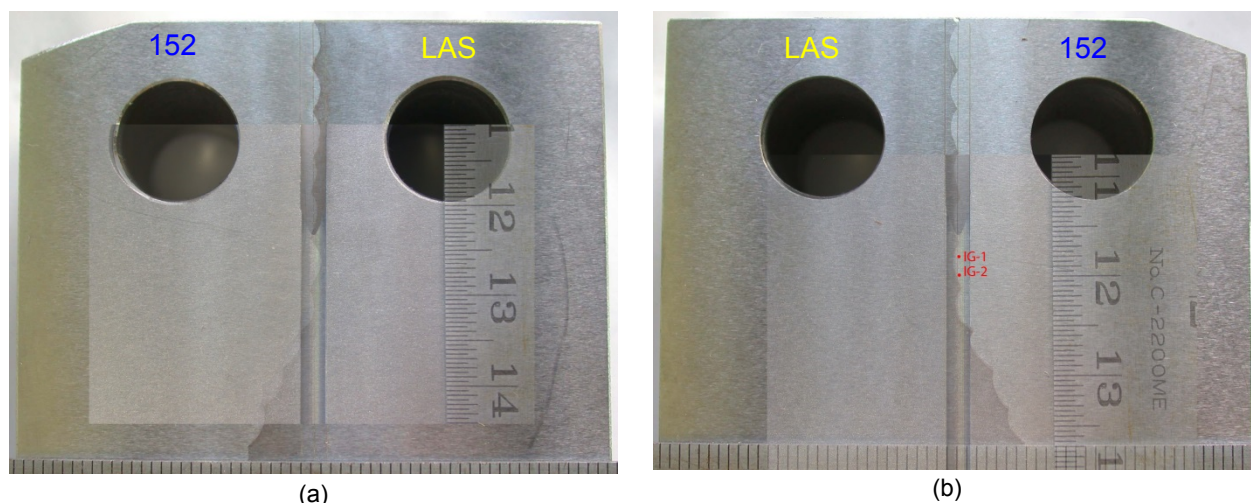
Specimen N152-LAS-1, overlapped images before and after the specimen notch was machined: (a) side 1, and (b) side 2. Units of the rulers are mm.
